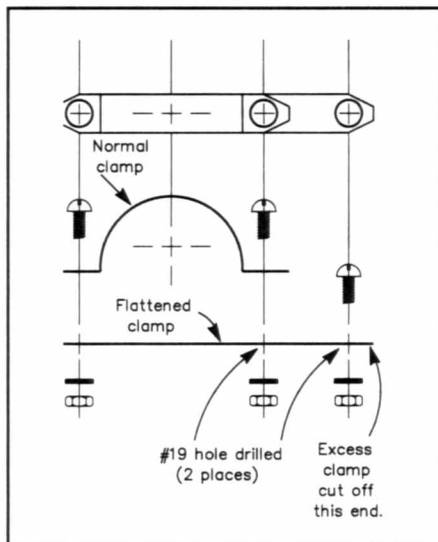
Detail of clamp assemblies. Both clamp assemblies are the same.
